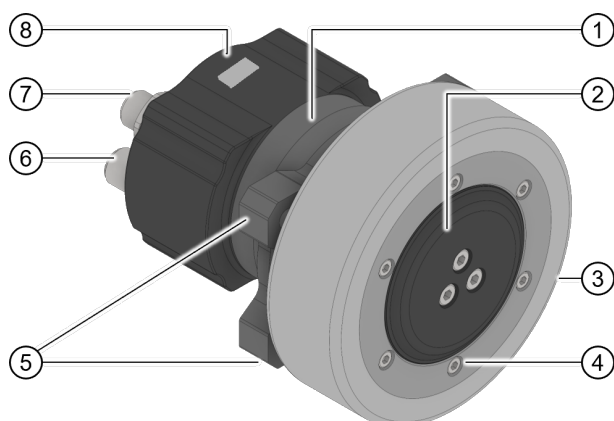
WD42 with 100-mm wheel. The changeable tire (3) partly covers the mounting points (5); the wheel rim (4) acts as a flange to change the wheel.
